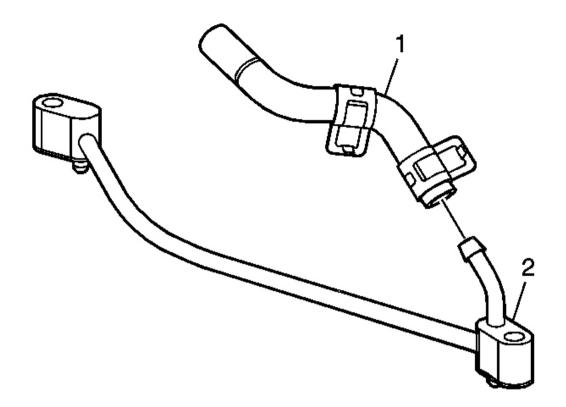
Coolant Air Bleed Hose & Pipe Courtesy of GENERAL MOTORS CORP.
